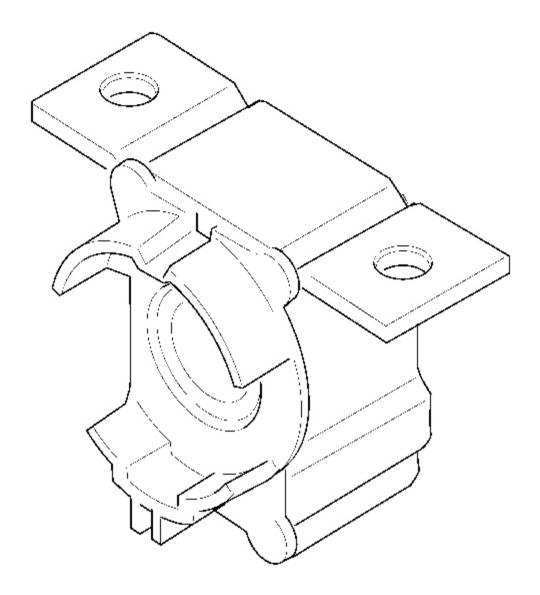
Adapter And Bearing Assembly & Steering Jacket Assembly Courtesy of GENERAL MOTORS CORP.
